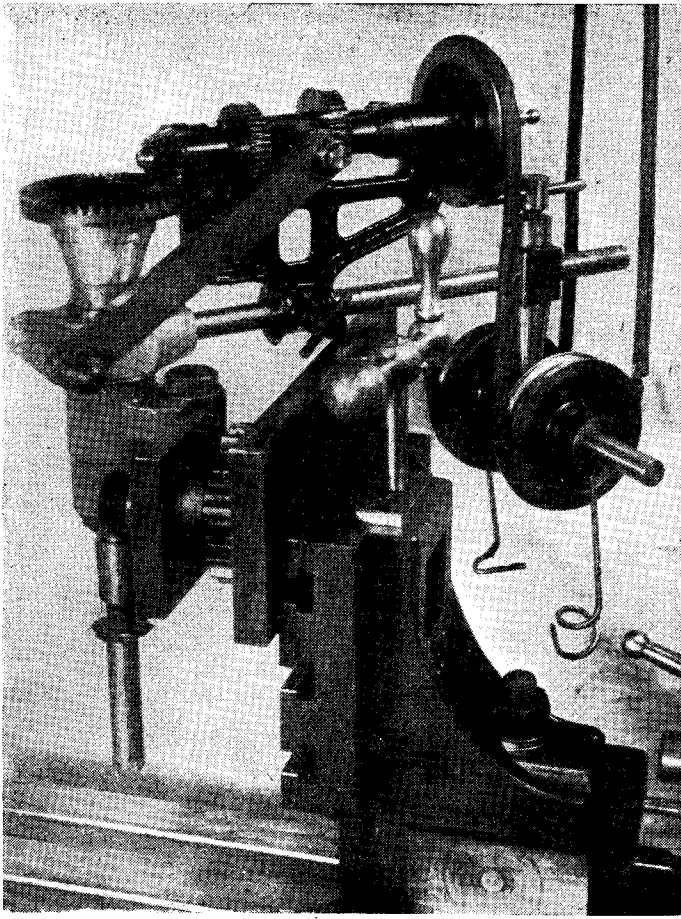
A back-geared bevel-driven attachment mounted on the vertical slide
